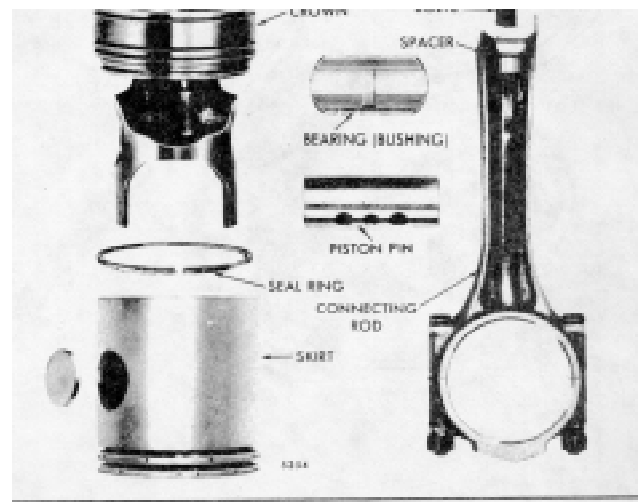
Cross-Head Piston and Connecting Rod Components
